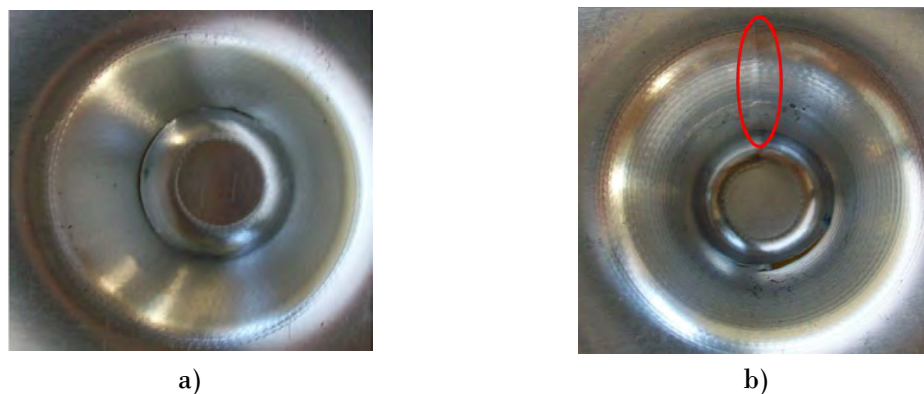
a) Spiral toolpath with good surface finishing. b) Unidirectional or bidirectional toolpath, with tool indentation.
